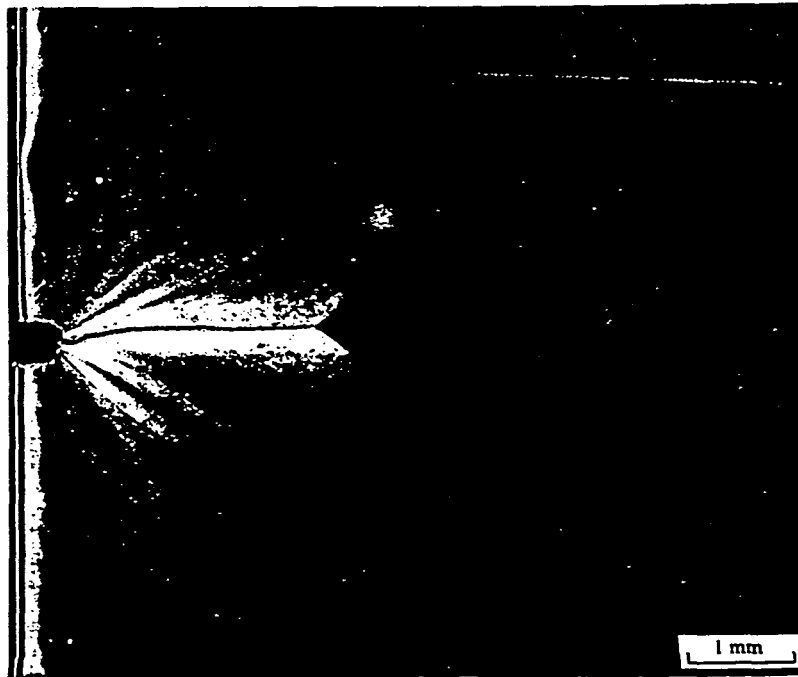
Example of stage II fatigue crack in metal [46].
